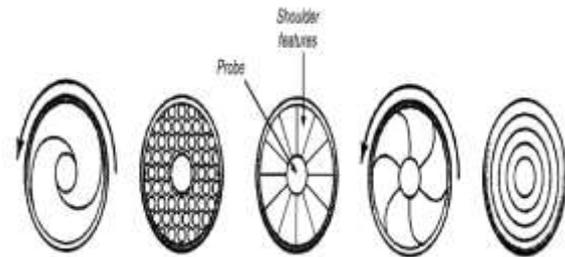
Tool shoulder geometries, viewed from underneath the shoulder.
